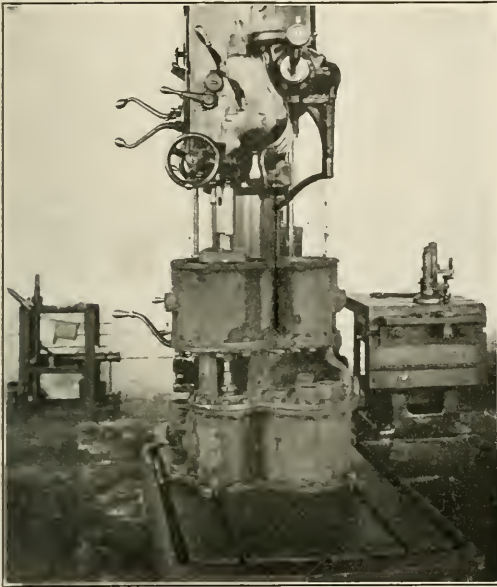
Radial Drill Equipped With Cylinder Boring Bar
